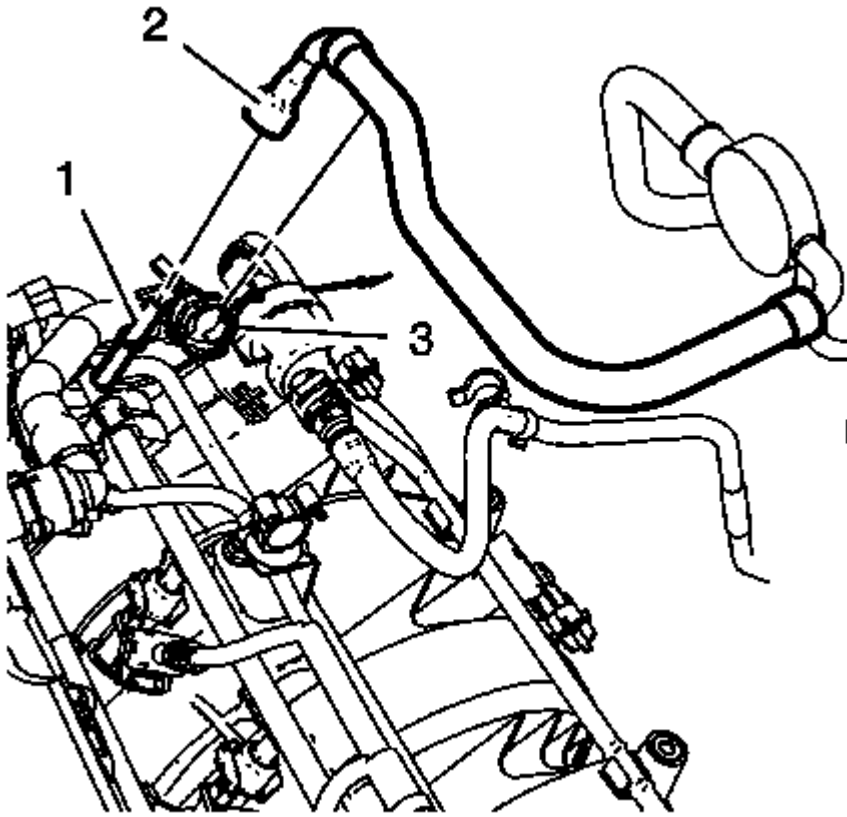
Throttle Body And Positive Crankcase Ventilation Tube
